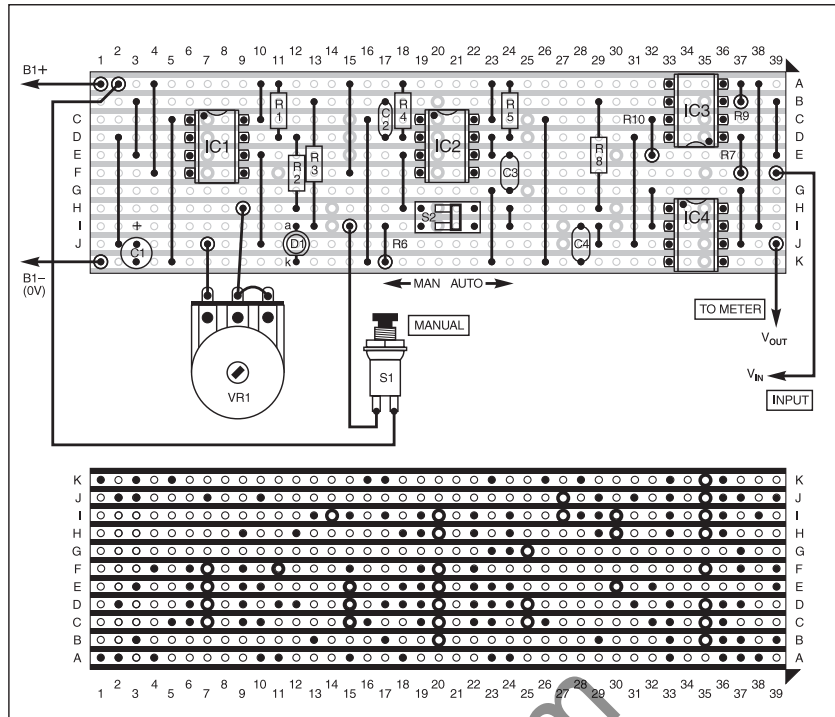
Stripboard component layout, interwiring and details of breaks required in the underside copper tracks.
